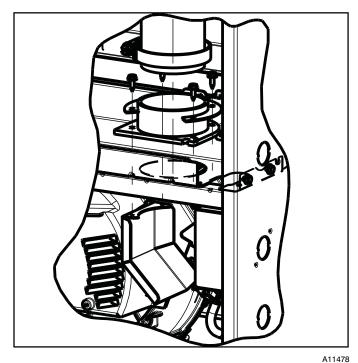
Rain Shield and Right Blower Shelf Seal Installation
